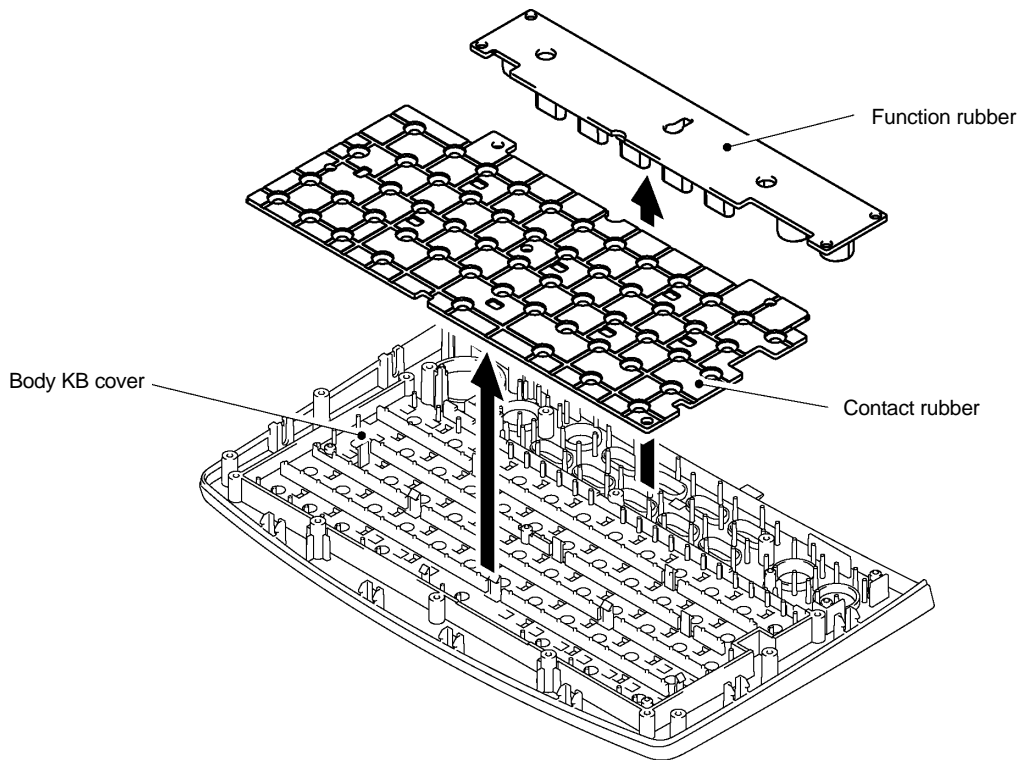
Disassembling the KB Unit/Rubber Key Unit (6)
